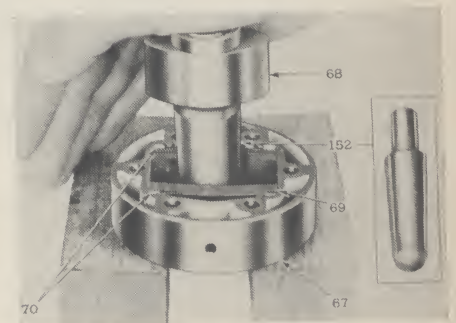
B—Using a tapered sleeve to install flexible coupling drive cam (68) between spring packs (69).
